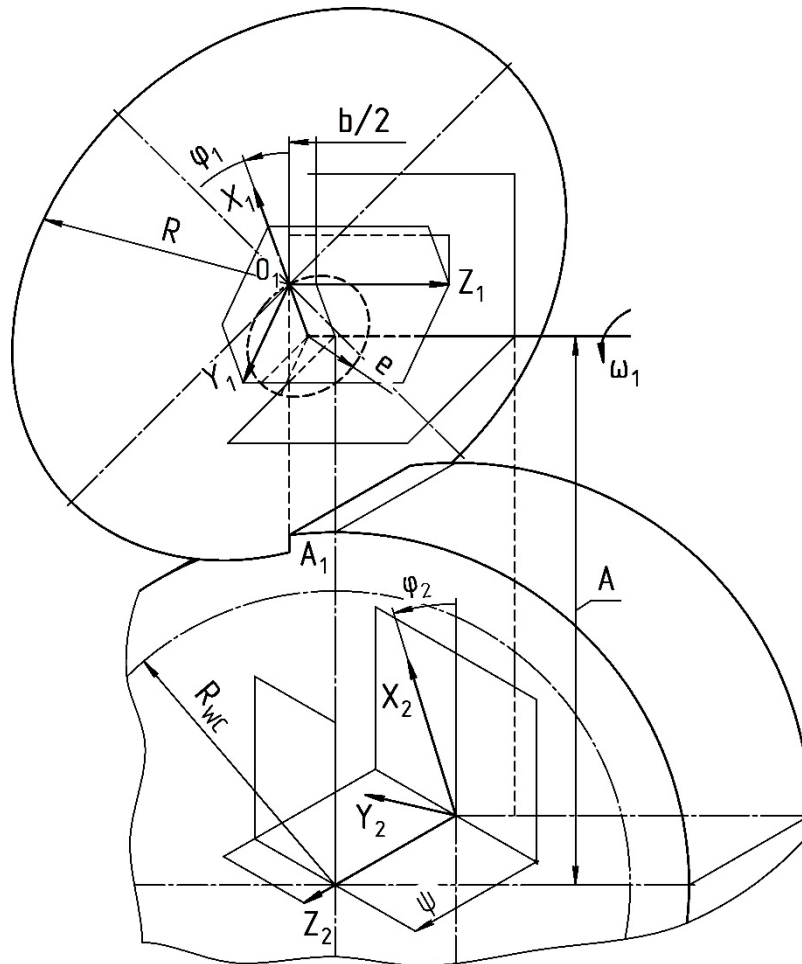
Scheme of continuous shaping of cylindrical gear tooth profiles with a disk milling cutter
